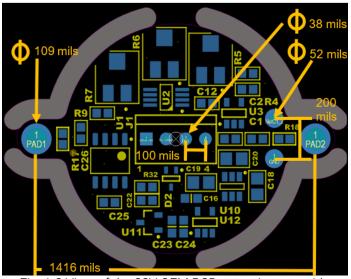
View of the 28V OEM PCB potentiometer side
